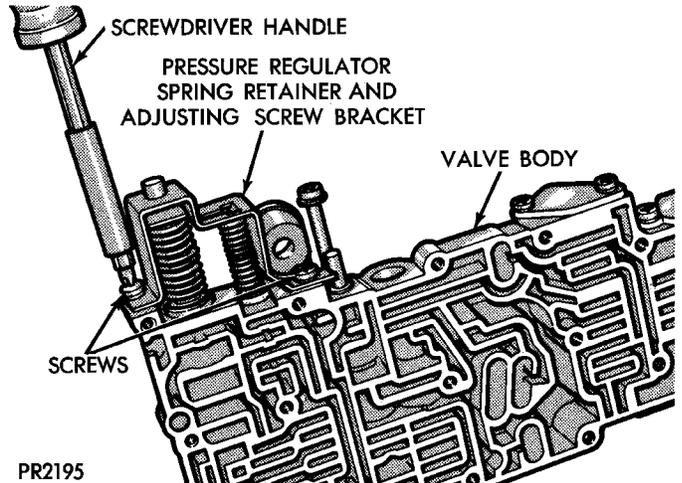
Pressure Regulator and Adjusting Screw Bracket
